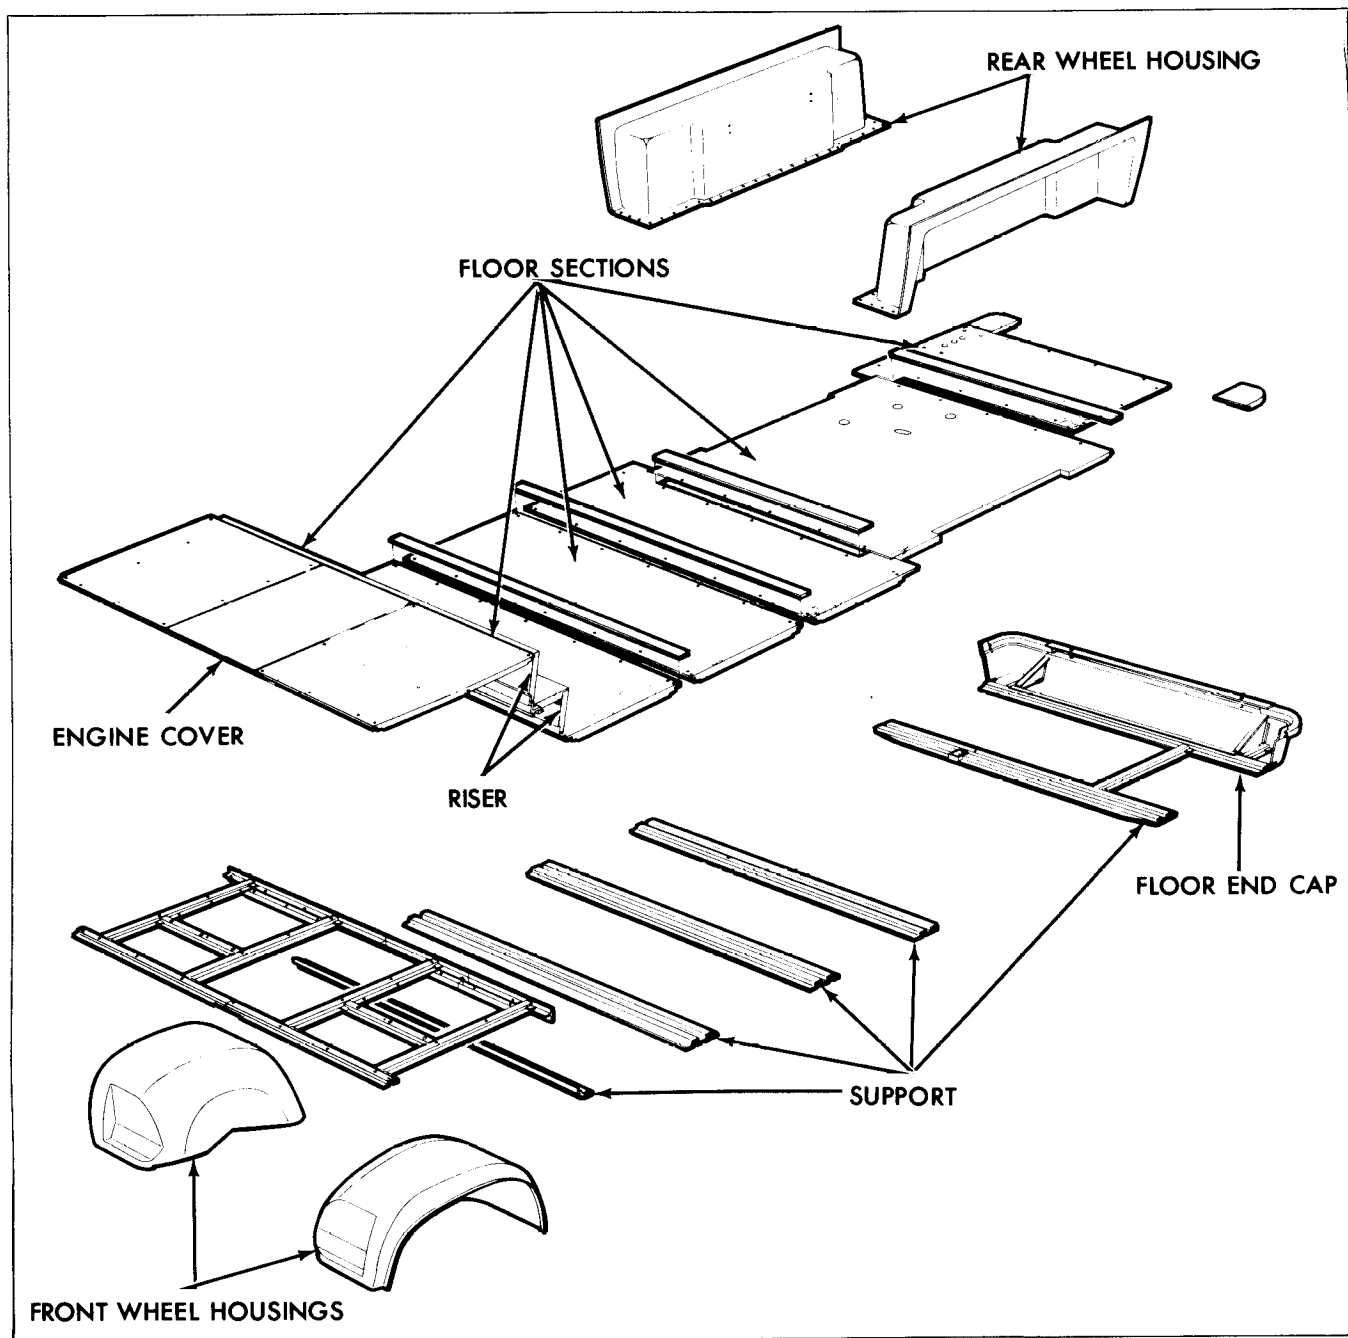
Wheel Housings and Floor (Model 260 Shown)
